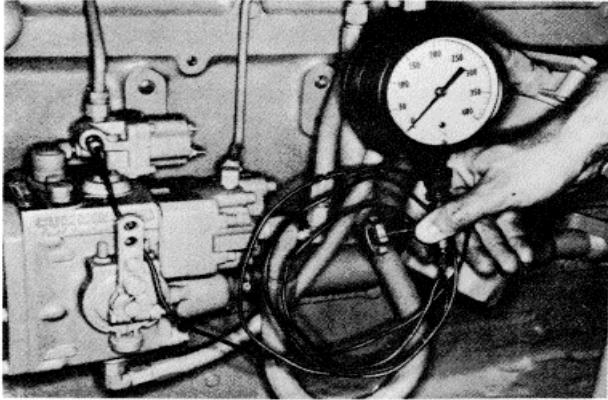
, (N11966) Checking fuel manifold pressure with ST-435
